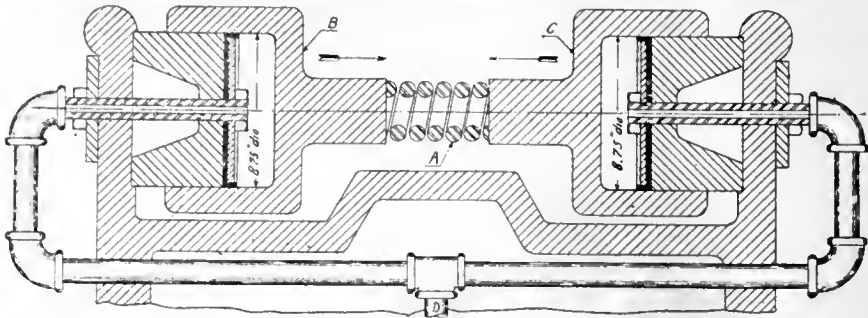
SECTION THROUGH CENTRES OF OPPOSITE CYLINDERS OF HYDRAULIC PRESS.
